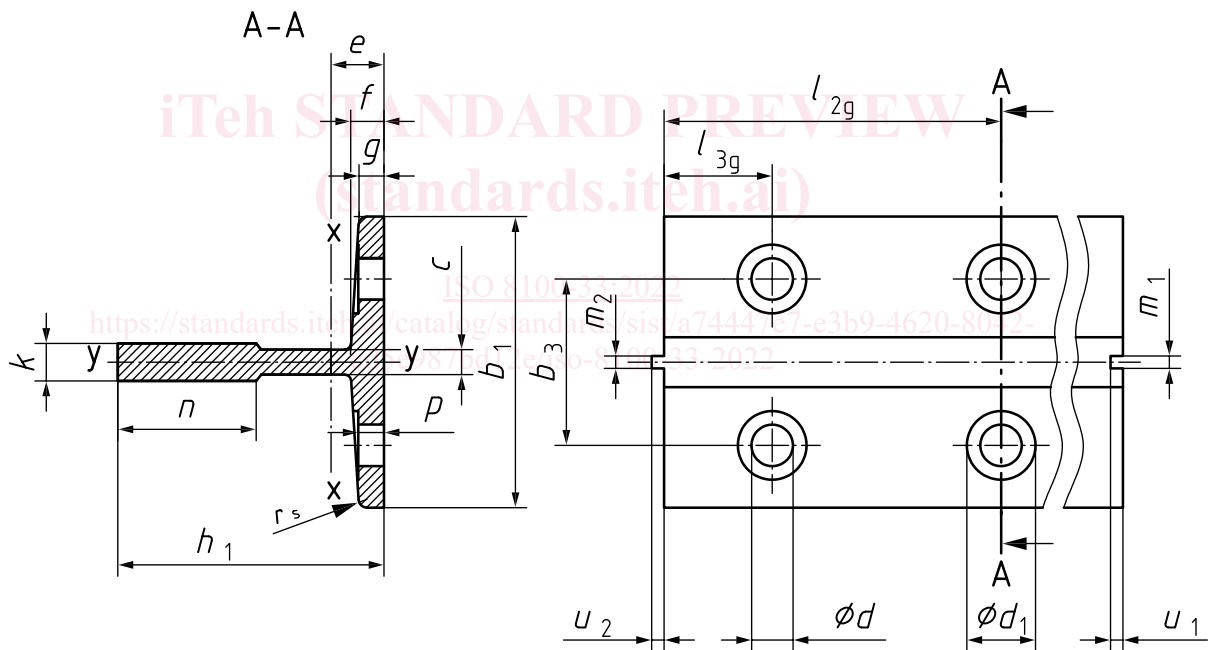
Cold-drawn, inclined-foot flange guide rail
